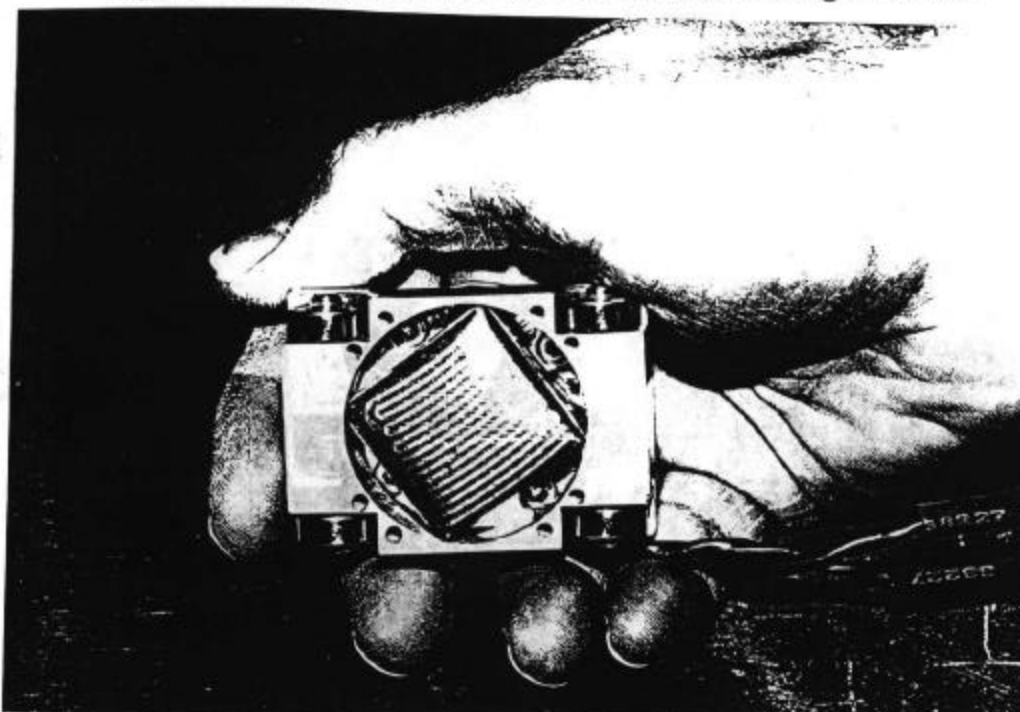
Underside of Diffraction EMAT Sensor for Surface Inspection of Welds
